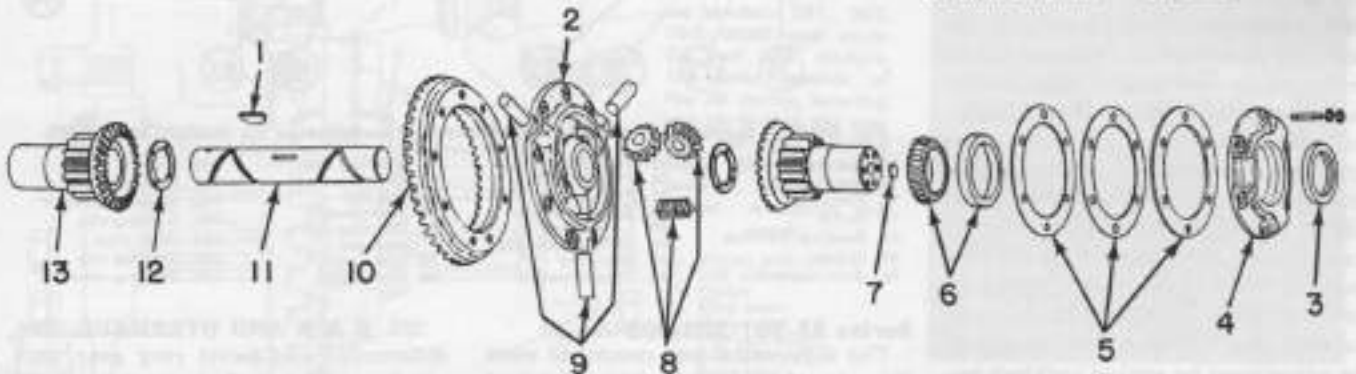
Exploded view of typical early production differential assembly as used on 101, 101 Super, 101JR, 102JR, 101SR, 102 SR, 102GJR, 102GSR, 30, 30K, 44, 44D, 44K, 44LP and 44(6). Some later models are equipped with bronze thrust washers for pinions.
